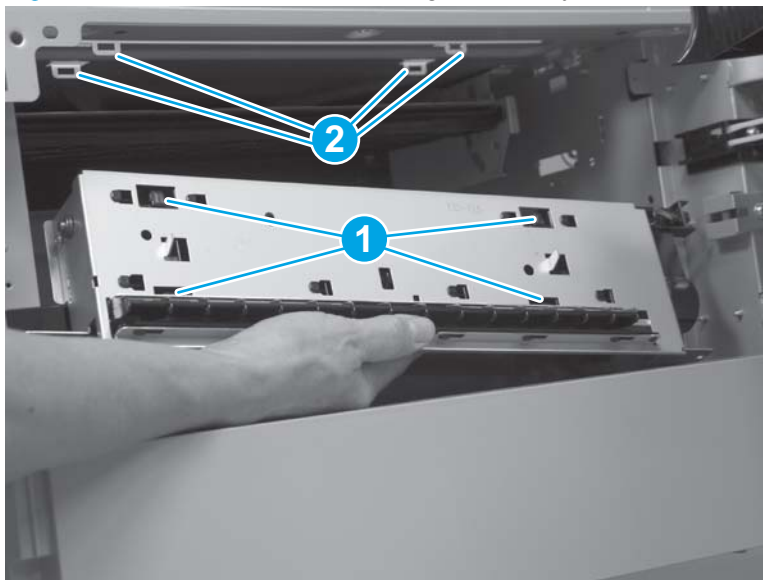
Remove the HCI merge assembly (2 of 2)
